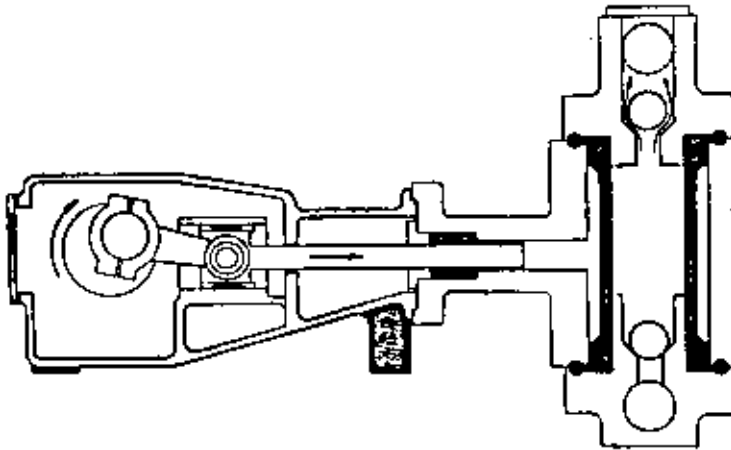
HORIZONTAL SINGLE-ACTING CYLINDRICAL DIAPHRAGM PUMP
